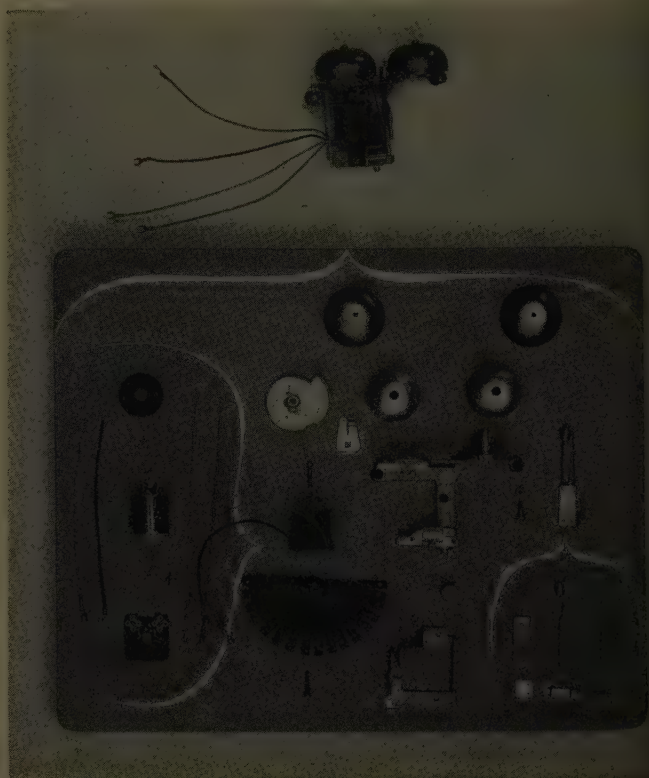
The ringer which uses one 2-coil winding instead of two coils as in previous ringers
